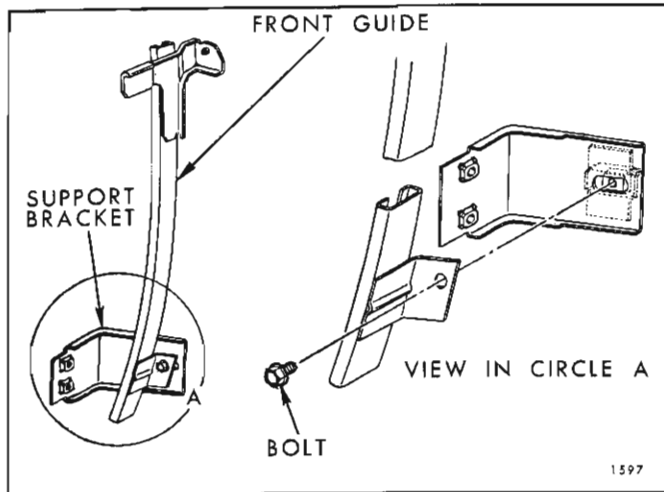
D70—Front Guide to Support Bracket Attachment - 68069 Style
